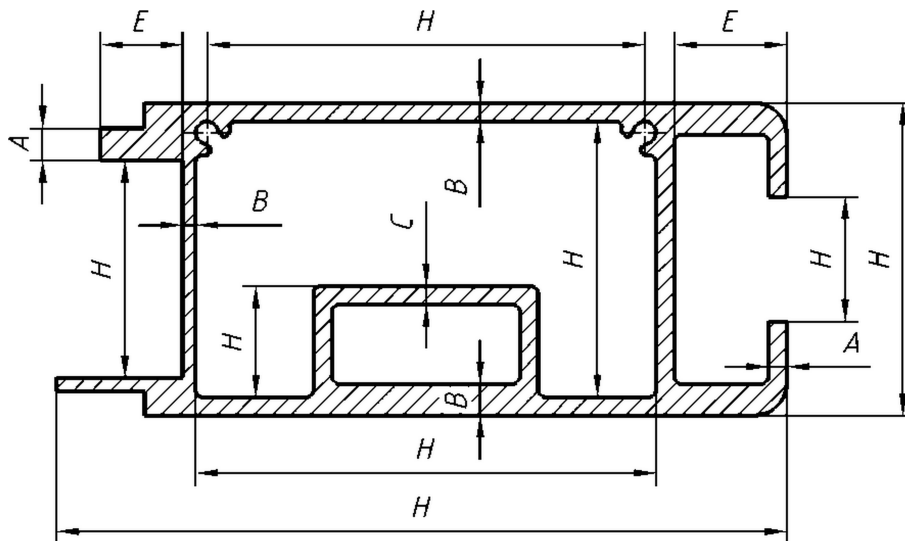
Definition of dimensions *A*, *B*, *C*, *E*, *H
